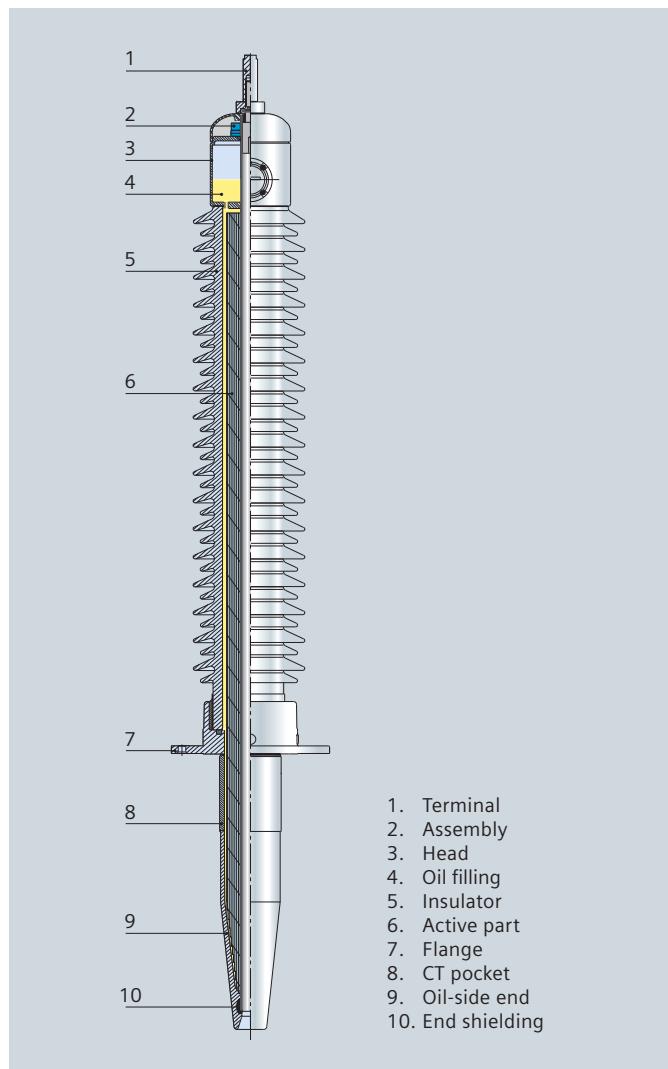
General design of an oil-impregnated paper transformer bushing (sectional view)
